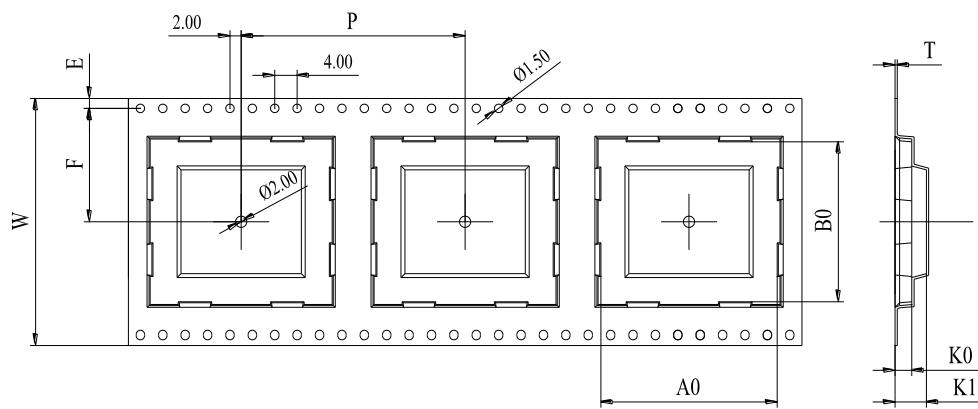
Carrier Tape Dimension Drawing (Unit: mm)
